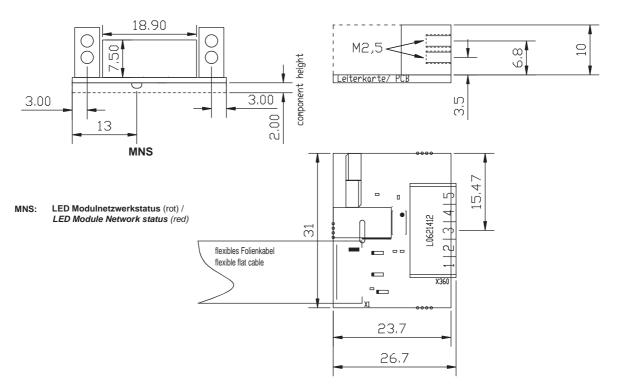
Dimensioning and LED Display DeviceNet Assembly Interface (AIFX-DN)
